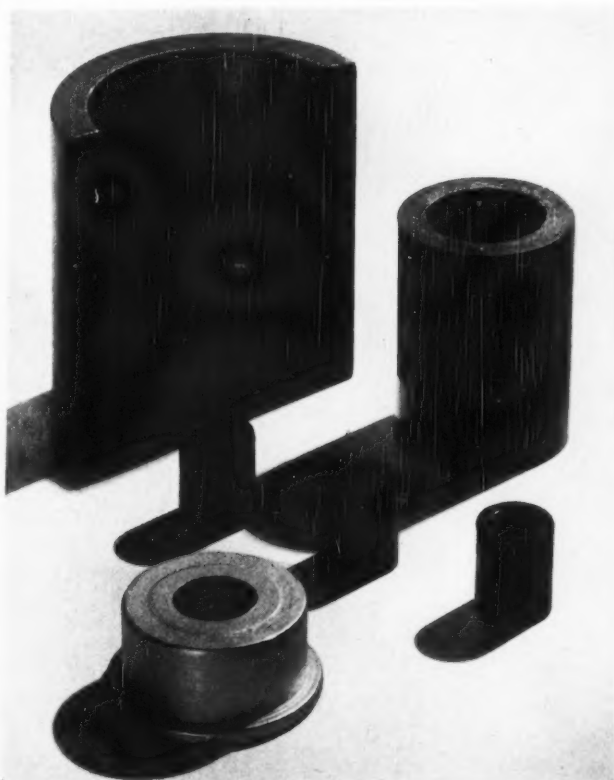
Graphite is compounded with these textile base, resinous bearings to produce a self-lubricating surface
